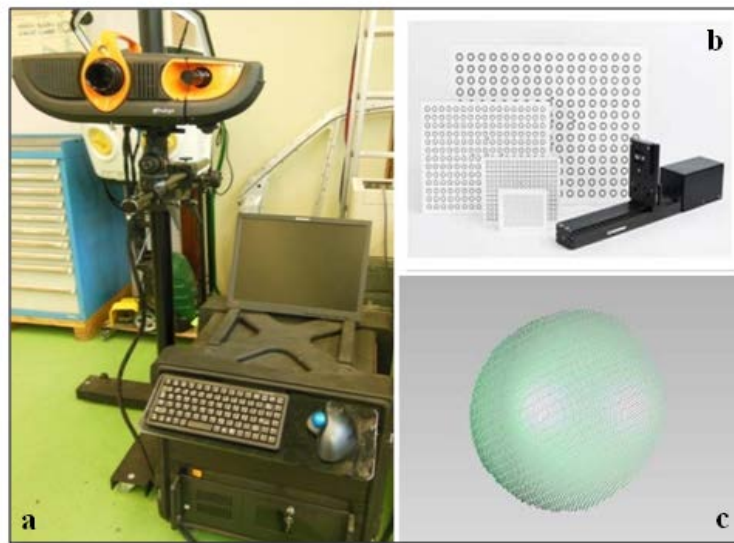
(a) Photography of SIDIO Pro equipment; (b) Camera calibration equipment; (c) Point cloud example.
